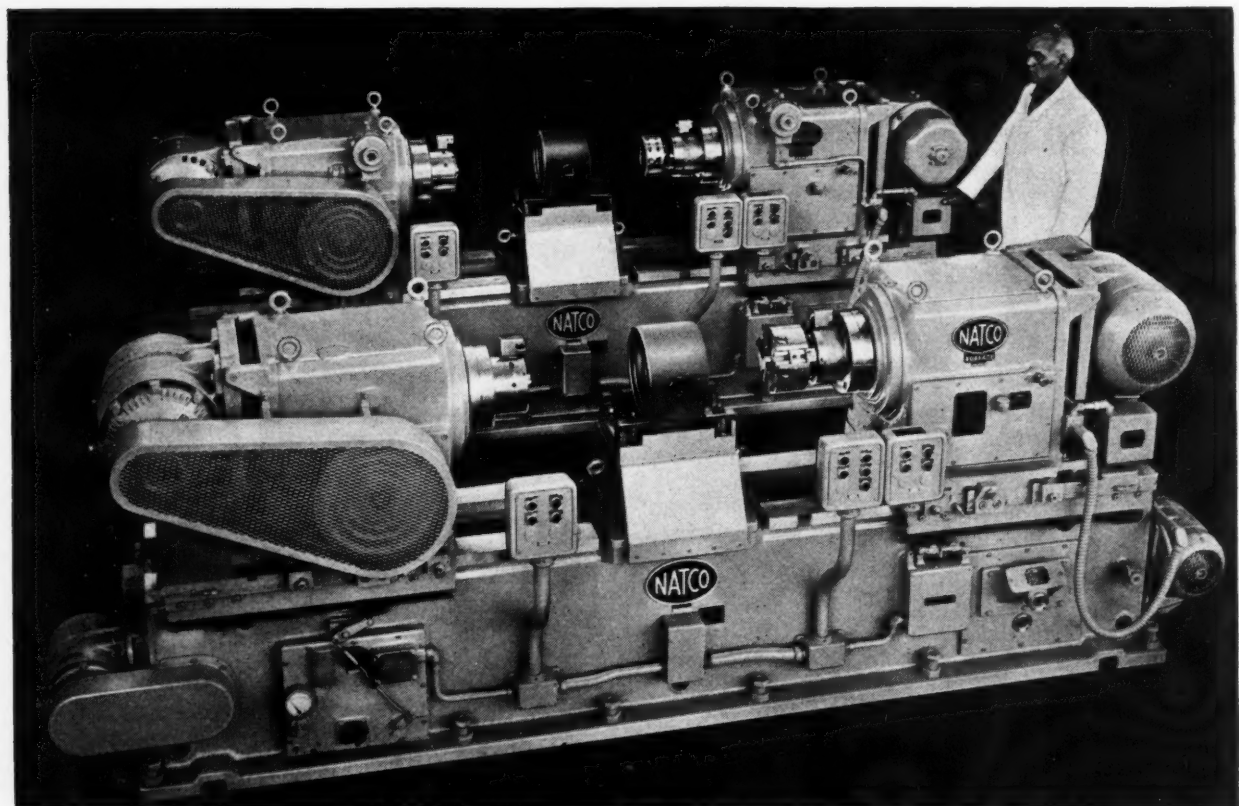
Natco Boring and Facing Machines Equipped for Boring Motor Frames
